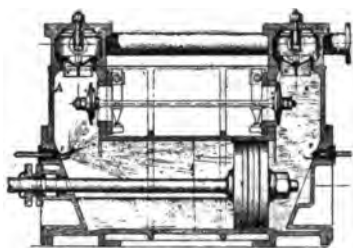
WATER COMPRESSOR WITH INJECTION COOLING.
